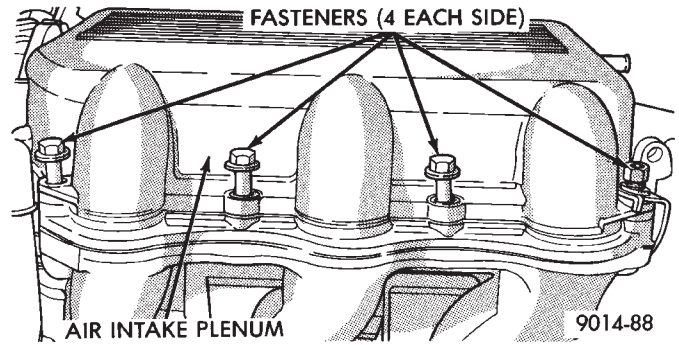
Air Intake Plenum to Intake Manifold Attaching Bolts
